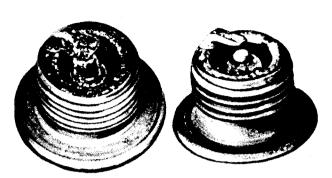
Faulty spark plugs. Left: cold plug used in an engine that should have a hot plug. Right: hot plug used in an engine that should have a cold plug.
